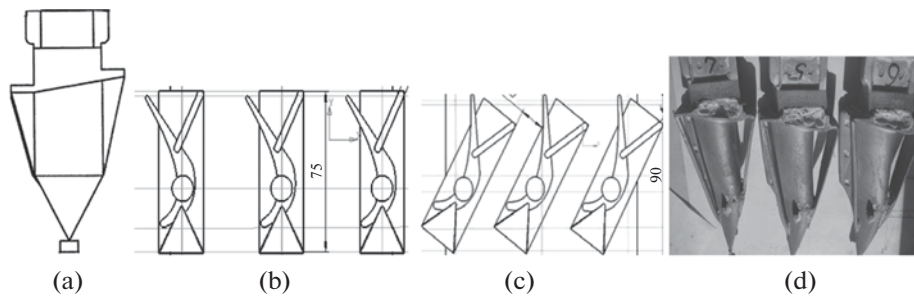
Sketch of a blade with a starting cone and a crystal carrier system: (a) side view, (b) lateral blade foot surfaces are parallel to heaters, (c) top view of blade units, and (d) single-crystal VZhM4 alloy blade ingots.
